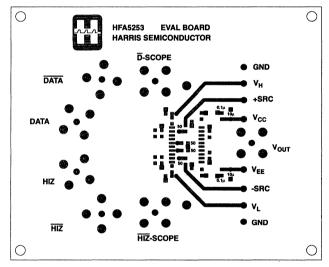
1X PC BOARD LAYOUT (BOTTOM VIEW)
